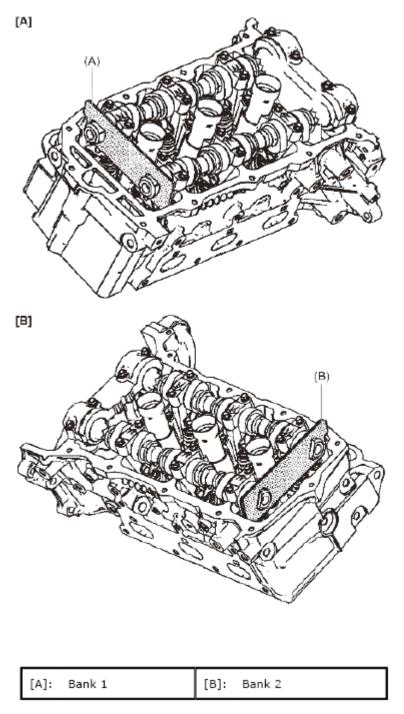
Identifying Special Tool Installed To Camshaft (Bank 1) And Camshaft (Bank 2) Courtesy of SUZUKI OF AMERICA CORP.
